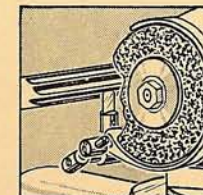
Reamer and Cutter Stop for Grinder No. 1362. "Macoc". \$2.00
